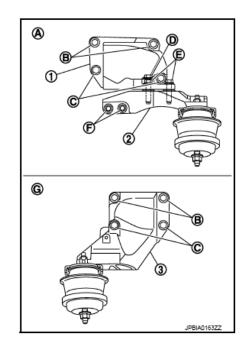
Engine Mounting Bracket Bolts Tightening Sequence (Right And Left Sides) Courtesy of NISSAN MOTOR CO., U.S.A.
